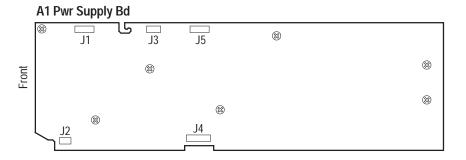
Screws holding the power supply circuit board (A1) in place
